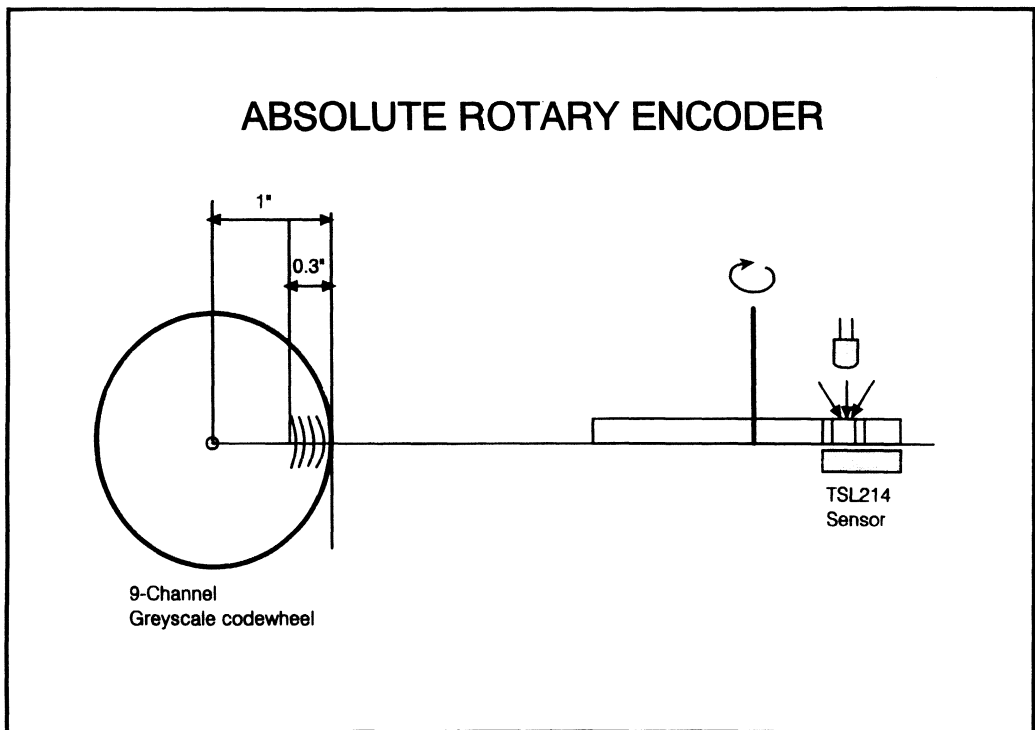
ABSOLUTE ROTARY ENCODER USING TSL214 - MECHANICAL LAYOUT
